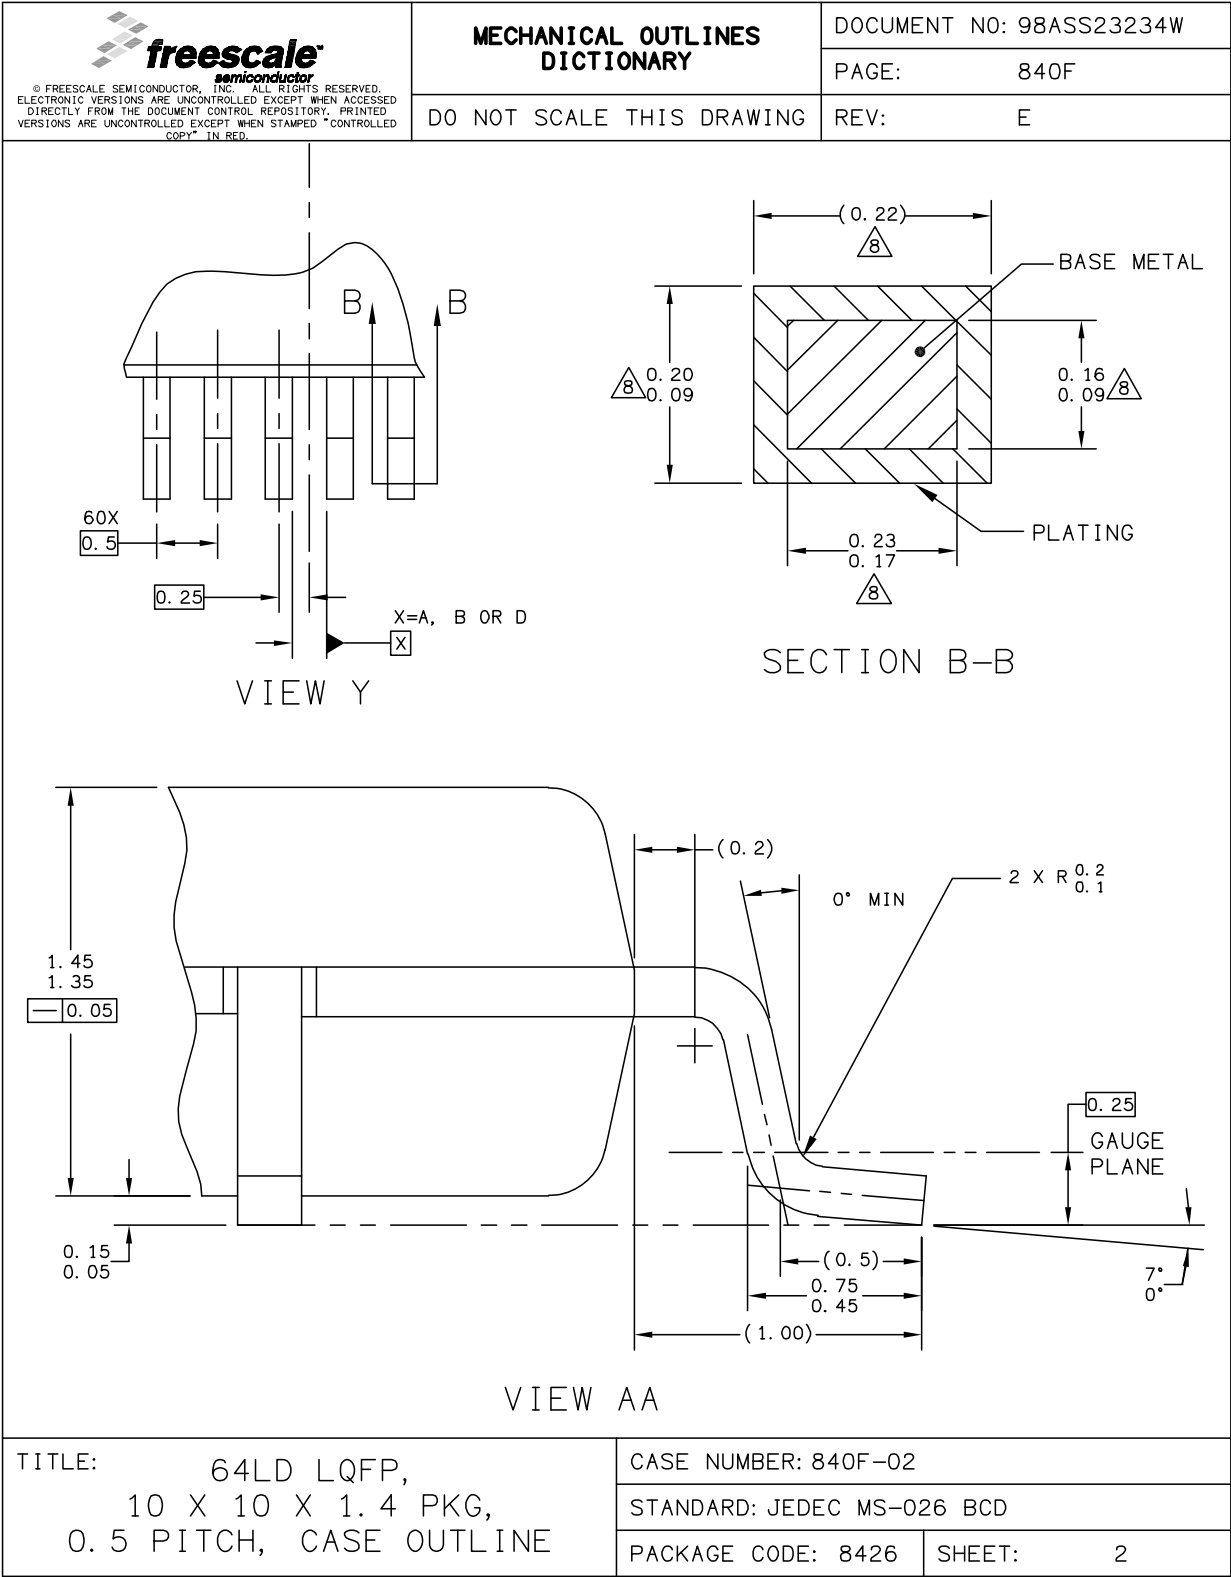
64 LQFP package mechanical drawing (2 of 3)
